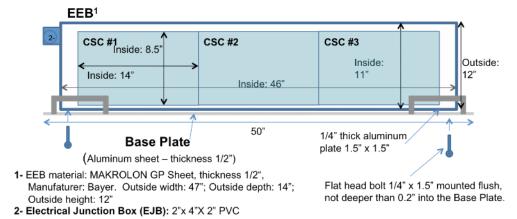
Detailed schematic front view of Experimental Equipment Box and base plate.
